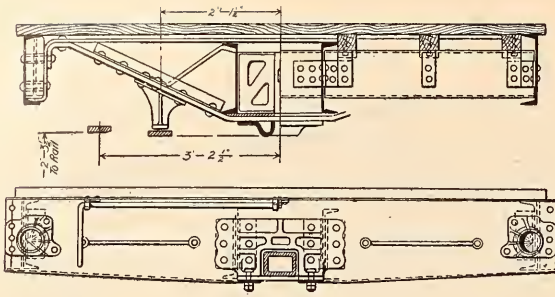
END ELEVATION AND SECTIONS OF FLAT CAR WITH STEEL UNDERFRAMING.
